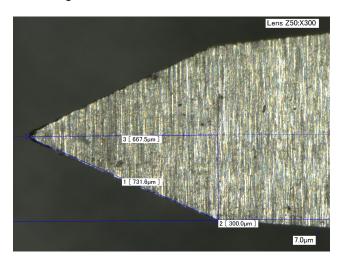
High frequency (1.4 THz) feed horn fabrication tool.
